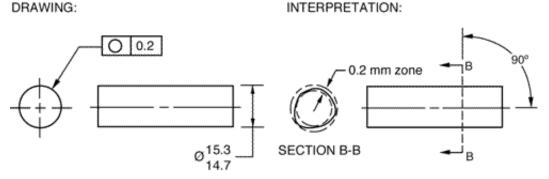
Technical drawing specifying a circularity tolerance equal to t=0.2 (GDT, 2013).
